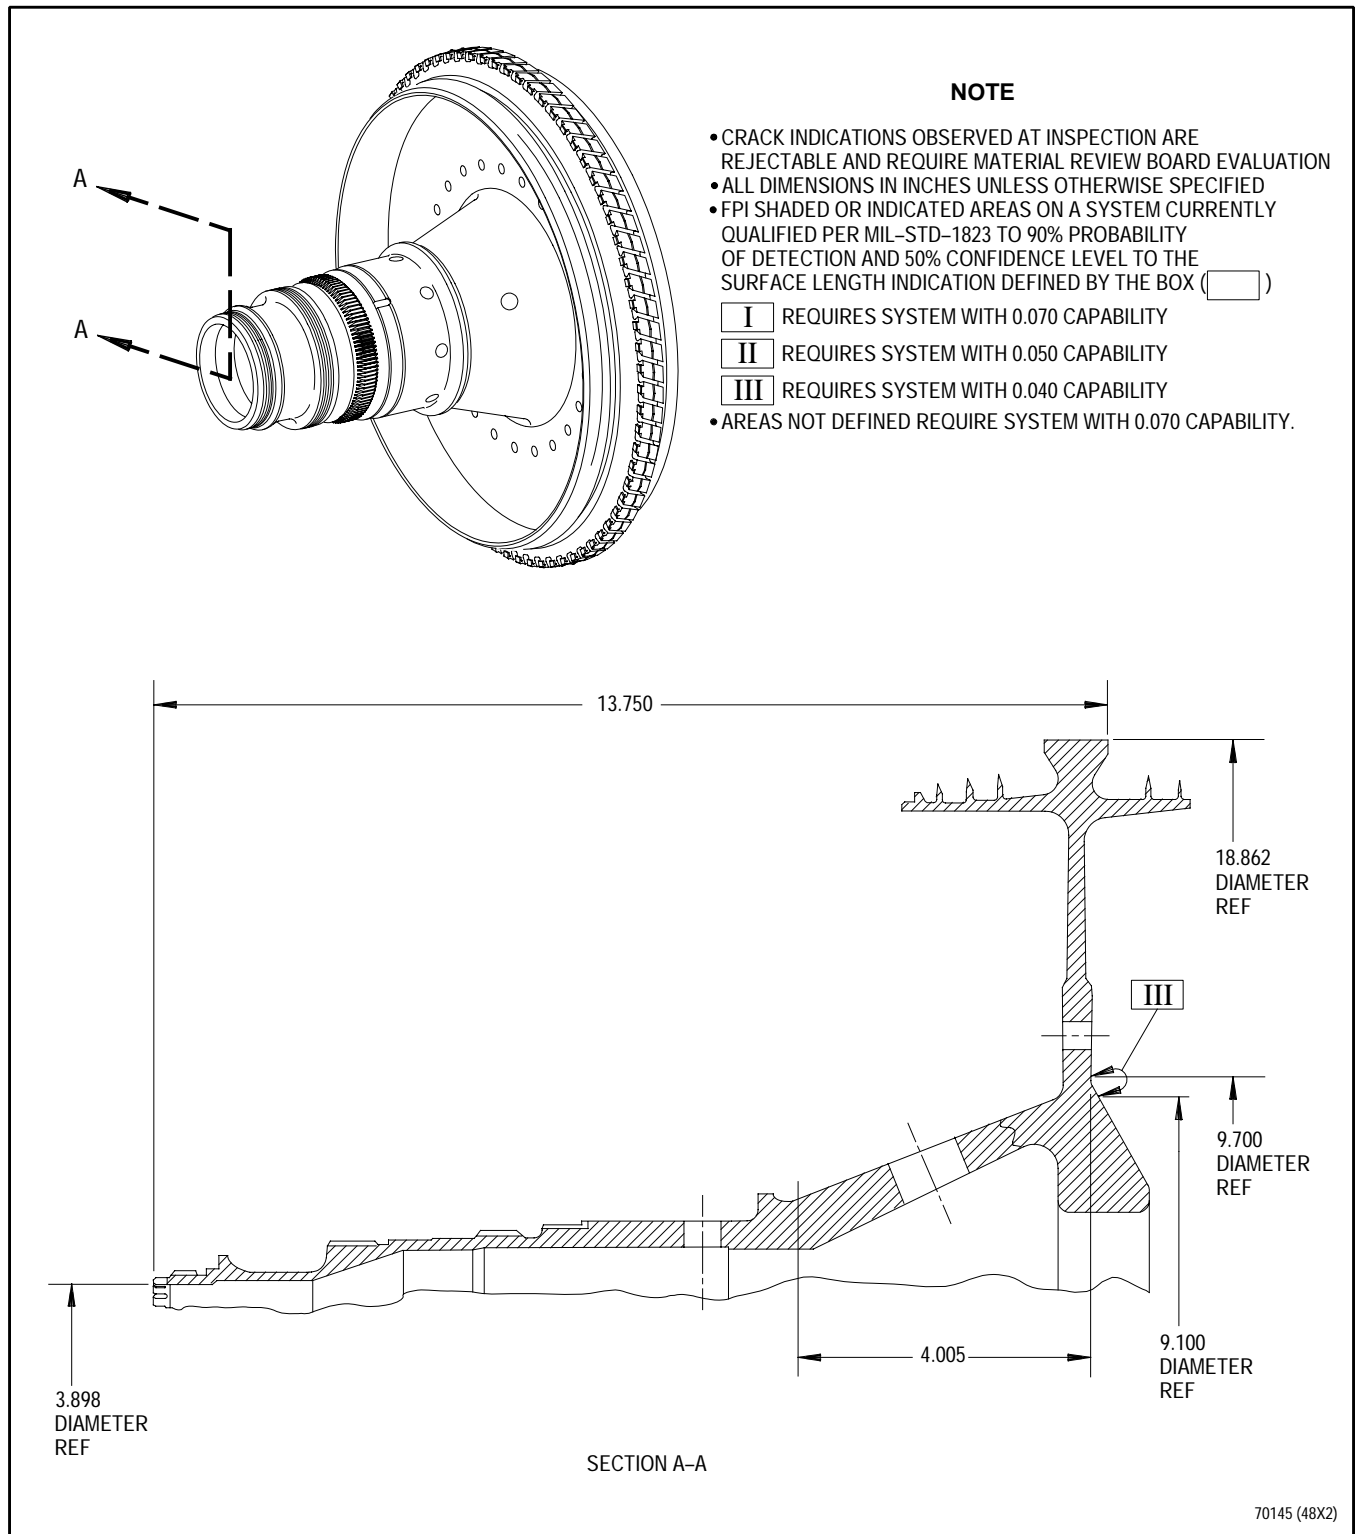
A. Sixth Stage Compressor Disk and Hub Assembly - Required Fluorescent Penetrant System Capability
